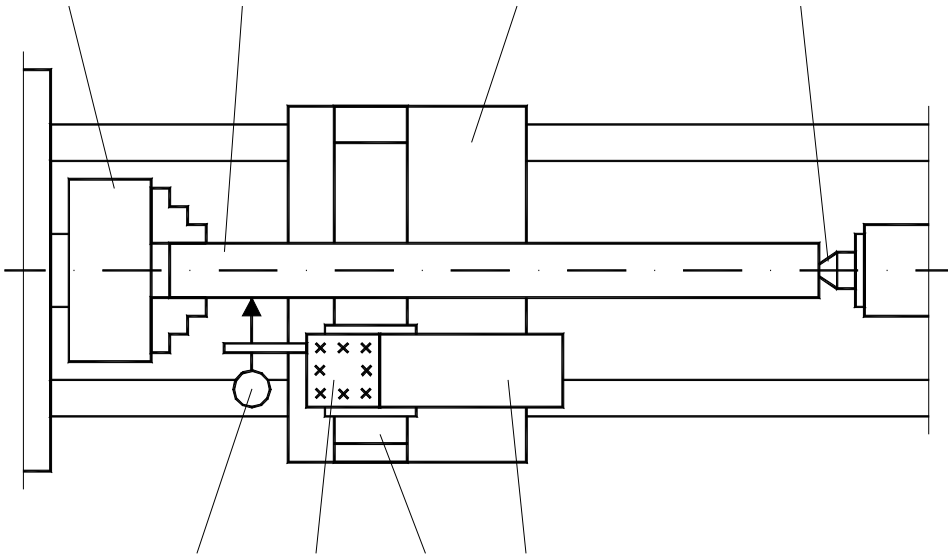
Measuring processing errors in LATHING a cylindrical piece
